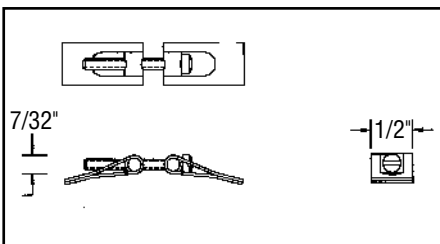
Low Profile — Barrel Nut Assembly Welded to Sheath with 6-32 Screw.
